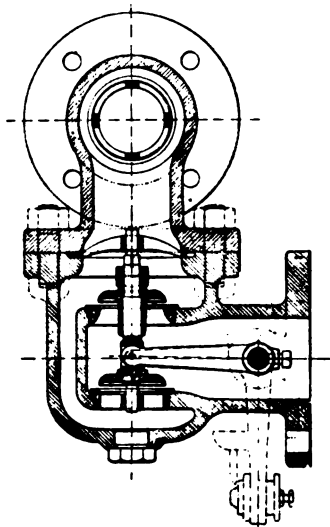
Governor Valve for De Laval Steam Turbine.
